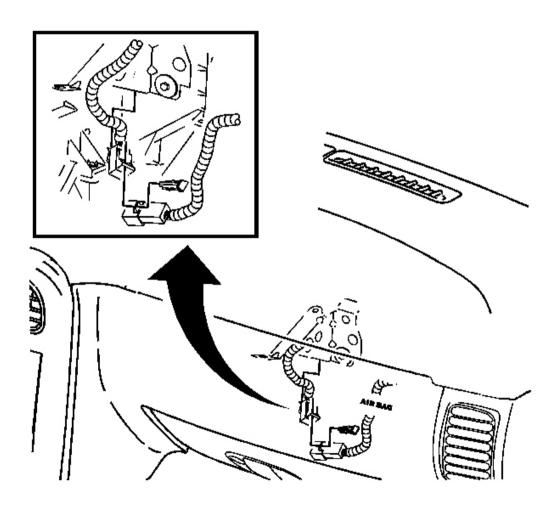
CPA & I/P Module Connector Courtesy of GENERAL MOTORS CORP.
